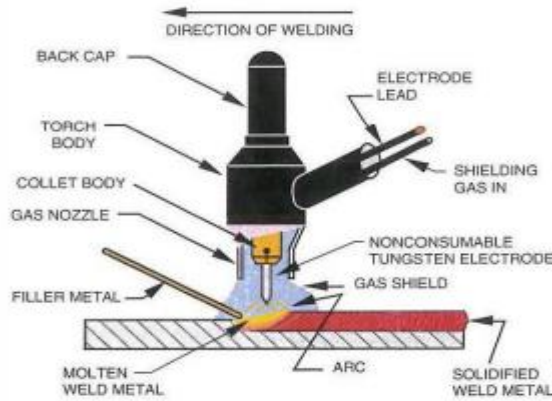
Schematic diagram of TIG welding [10]
